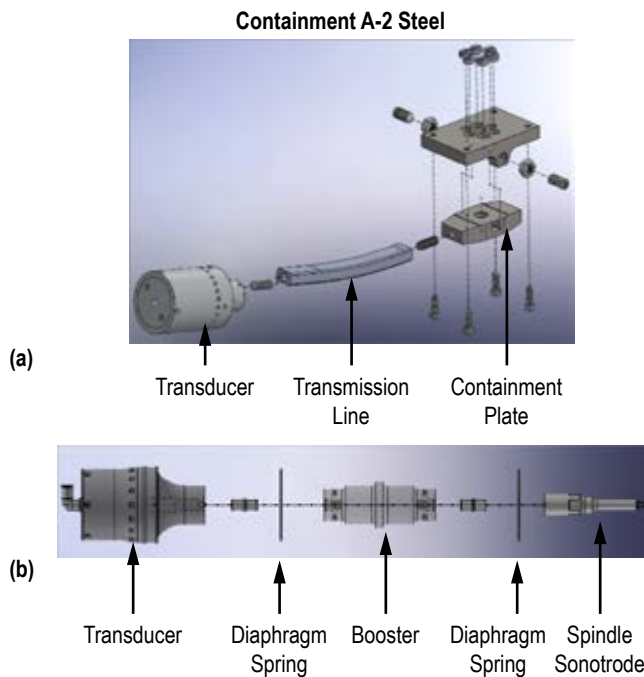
Ultrasonic assembly in (a) containment plate and (b) the spindle sonotrode.
